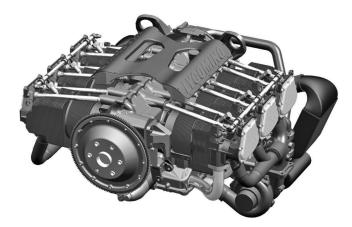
Lycoming six-cylinder iE² engine.
